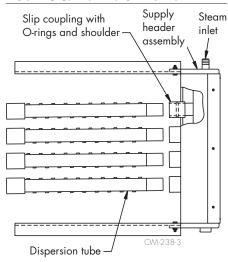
SLIP COUPLING WITH O-RINGS AND SHOULDER
